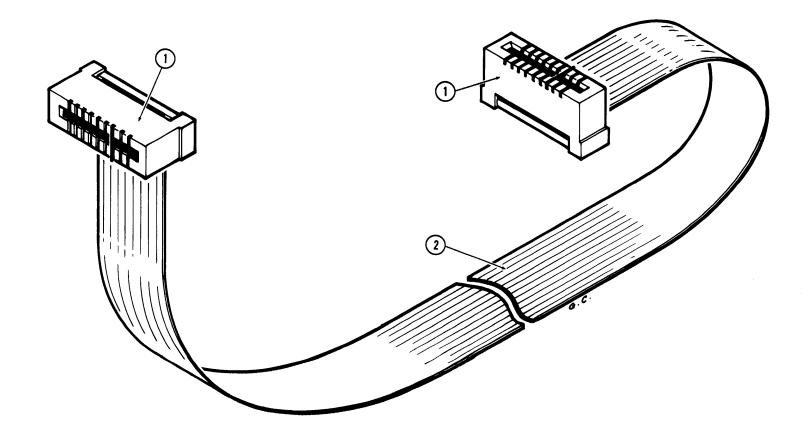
23731 KEYBOARD CABLE ASSEMBLY
